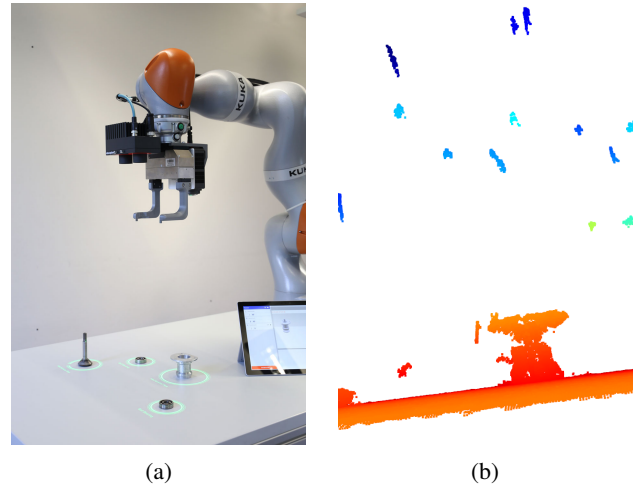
Robot setup for assembling a gear box with (a) a lightweight robot and a 3D camera sensor, (b) point cloud scene of mechanical gearbox parts on the table.
